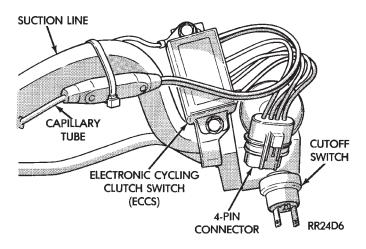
Remove or Install Electronic Cycling Clutch Switch
